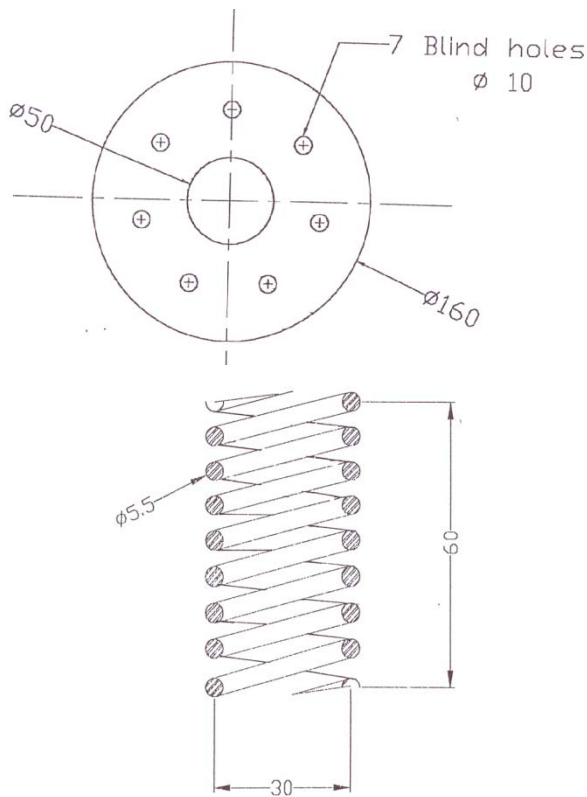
Dimensions of a blank holding spring and the blank holding lower plate (mm).
